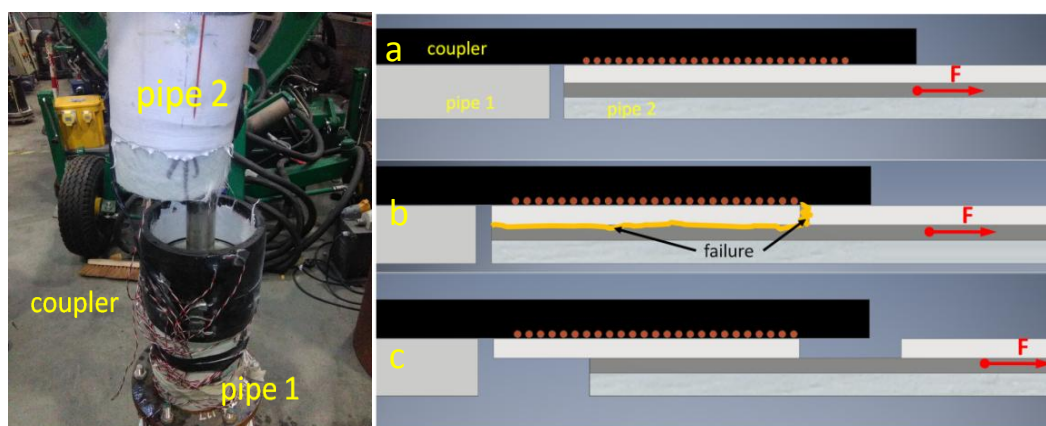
Photograph of the failed whole joint tensile test sample and a suggestion of the failure mechanism
